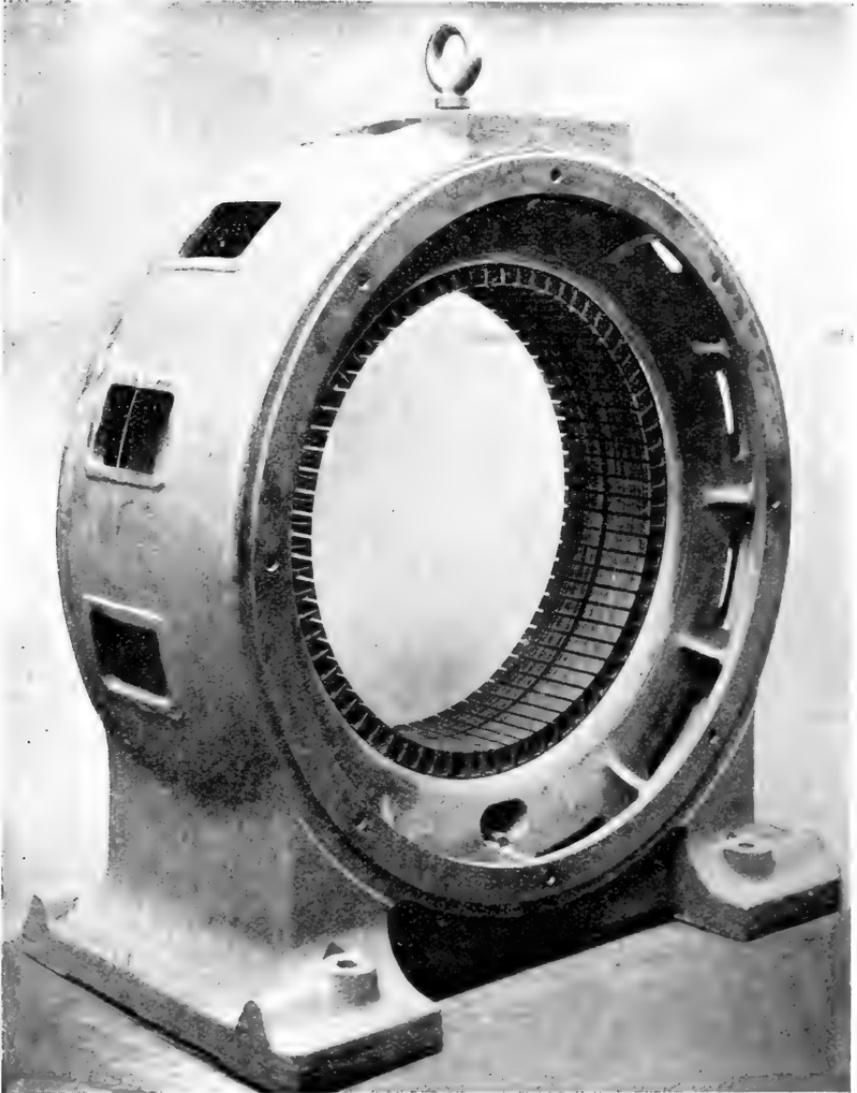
Complete Assembled Stator ready for Winding. Scott & Mountain.
